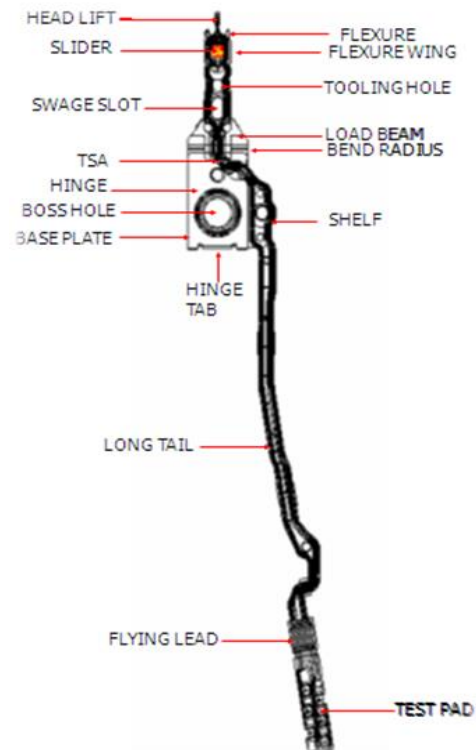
Head Assemble Gimbal (HGA) overview
